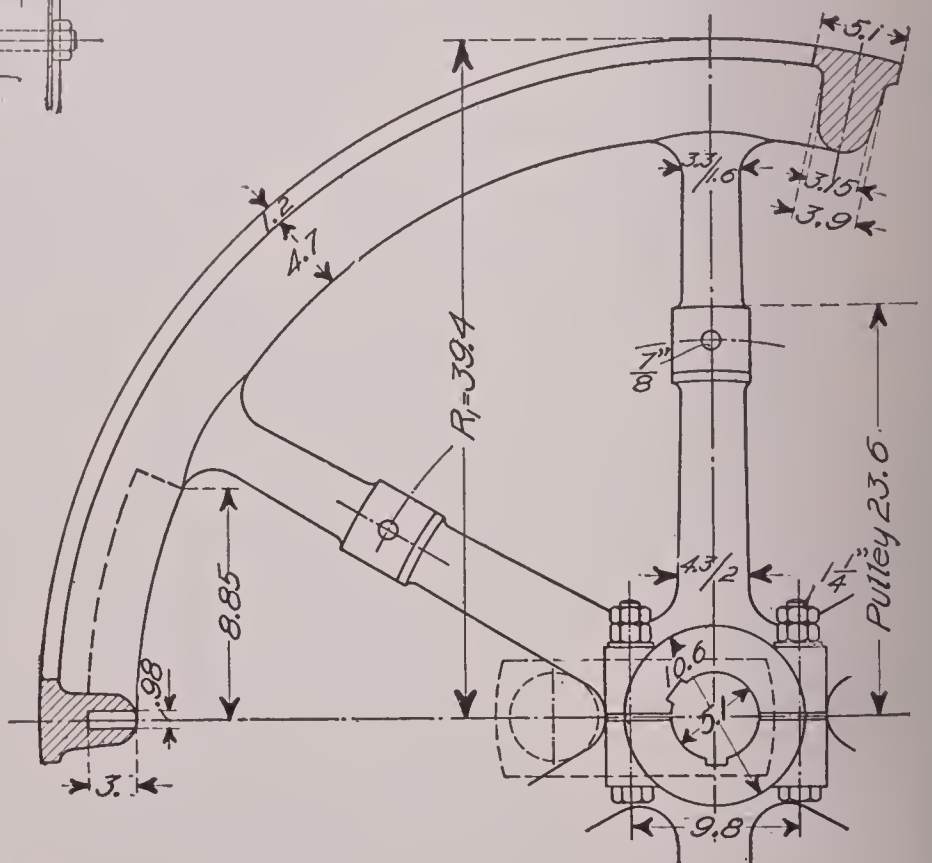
Hub and Belt Pulley for Wheel shown in FIG. 299.
